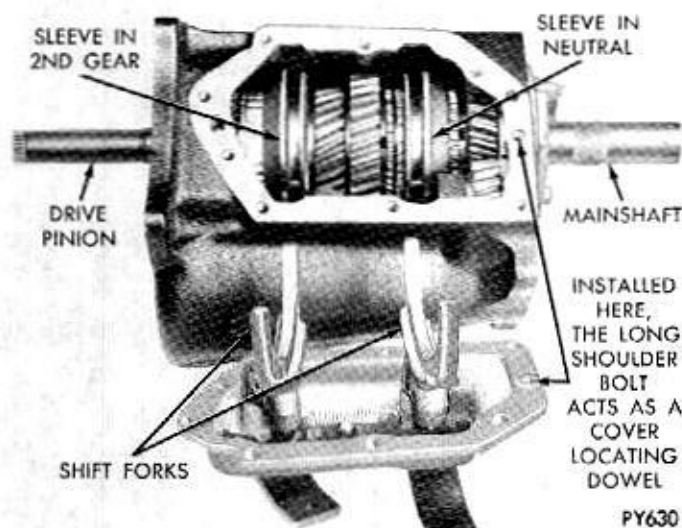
A-230 With Shift Mechanism Assy., Pinion Bearing Retainer, and Extension Housing—Removed
